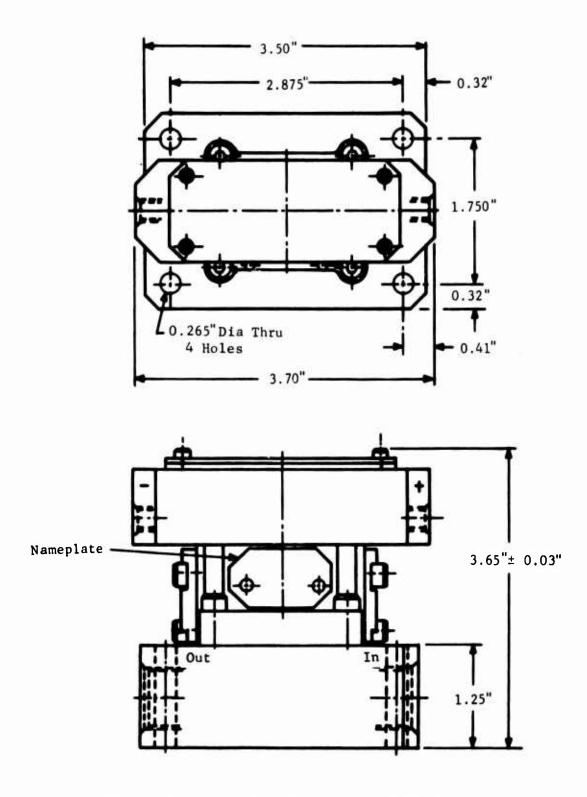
Installation Drawing of Pneumohydraulic Transducer (2 of 2).
